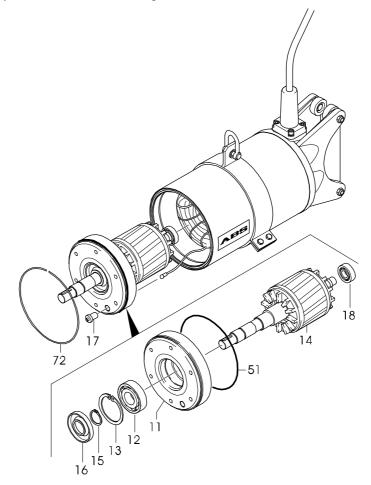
Dismantling the motor shaft/fixed bearing unit (RW 400/650)
